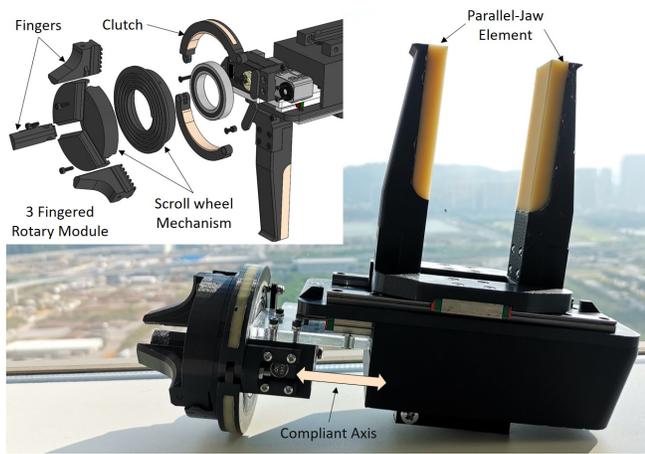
The proposed gripper consists of a 3 fingered rotary module and a parallel-jaw element. The 3 fingered rotary module utilizes a scroll wheel mechanism and a clutch to perform grasping and rotational motions. The full mechanism is depicted in exploded view. The parallel-jaw element uses a rack and pinion mechanism to execute grasping motions with a set of modular fingers with highly compliant finger pads.
